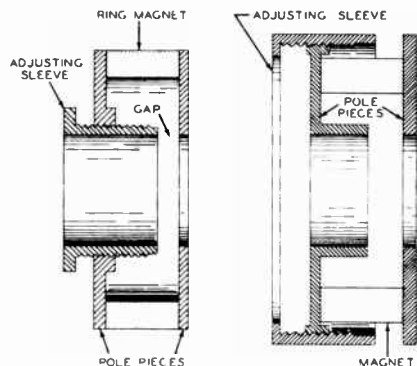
Focusing Adjustments by Means of Threaded Rings of Magnetic Metal.
